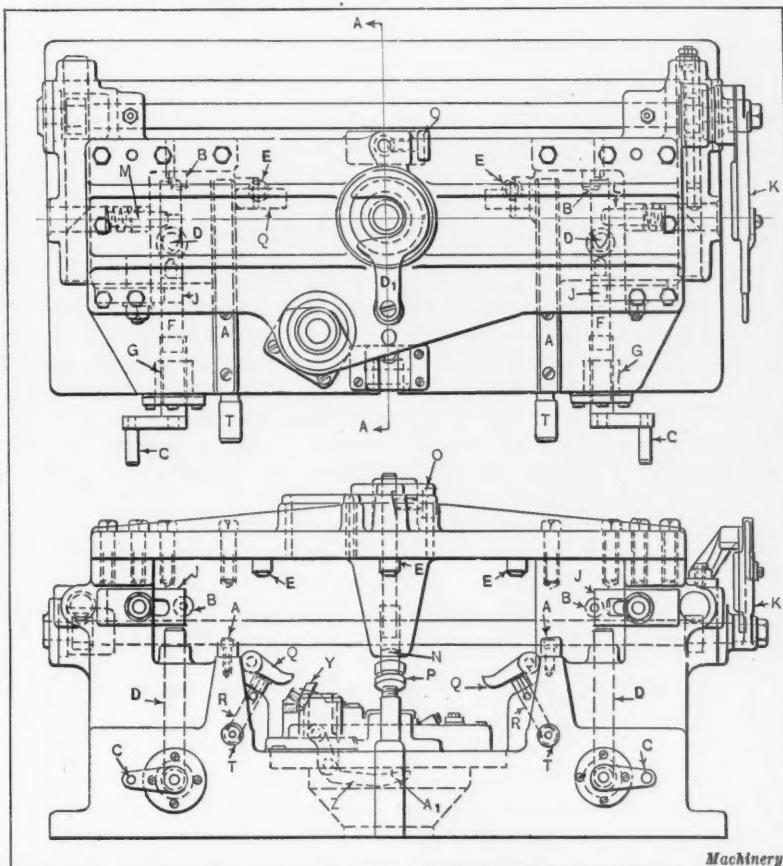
Jig employed in boring and milling an Automobile Flywheel Housing
